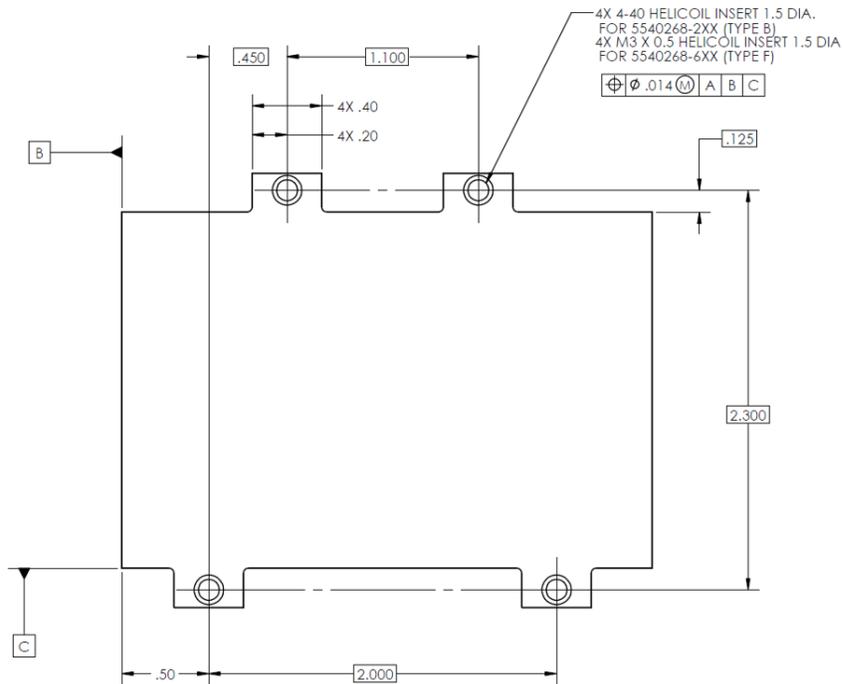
Radial Pins and Threaded Package Bottom View (Case B or F)
